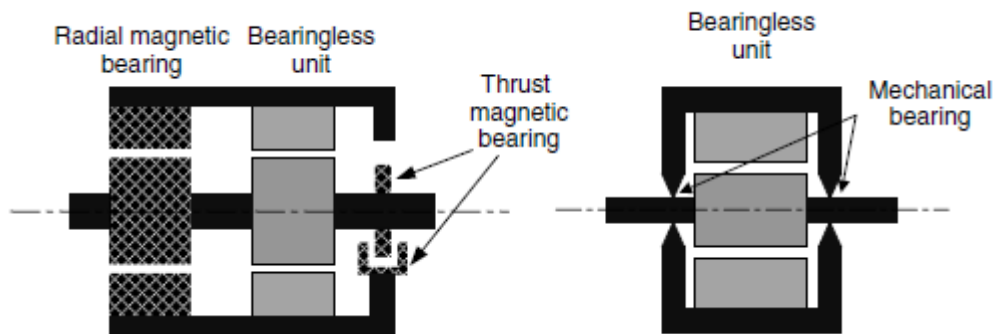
Combination of bearingless unit with radial magnetic bearing (left) and mechanical bearing (right). [3]
